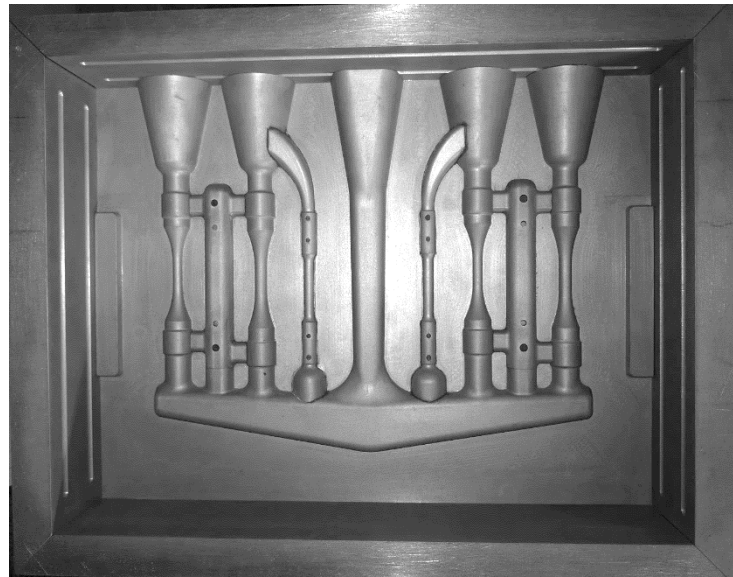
CNC machined aluminum mould (half of the mould)
